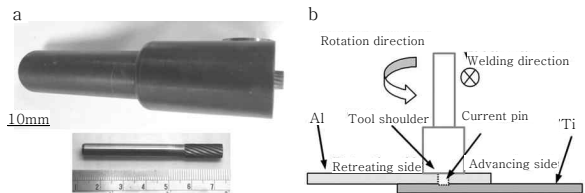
Tool appearance and schematic diagram of a lap joint showing. (a) the external view of the stir tool and the cutting pin and (b) schematic diagram of a lap joint²⁾
